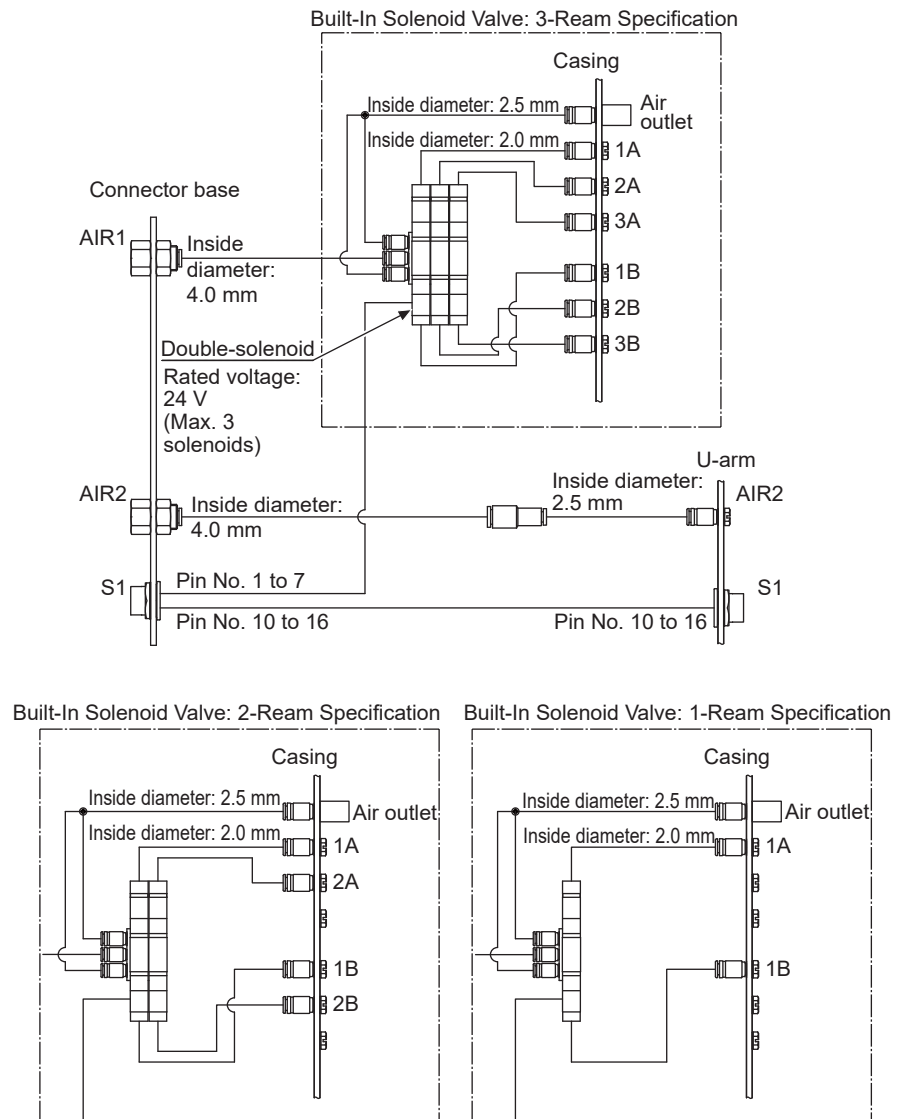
Details of the Connector Pin Numbers (with the Built-In Solenoid Valve)
